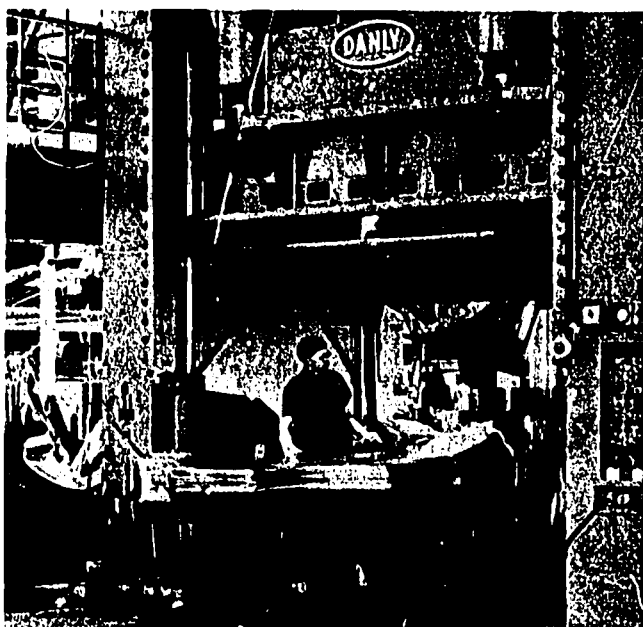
Large presses, such as the one shown here, are often used to shear standard stock materials to size. This press will put over 600 tons of pressure on a cutting edge to shear material to the right size.
